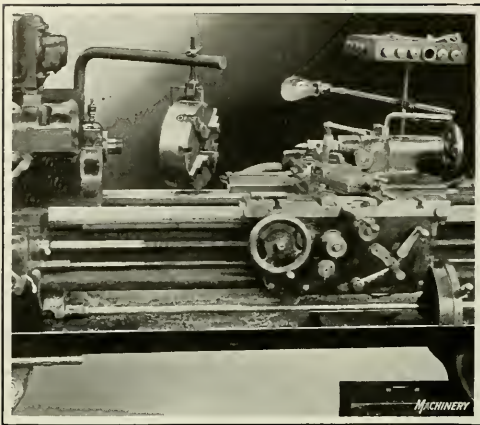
Engine Lathe provided with such Auxiliary Equipment as a Chuck Crane, a Collet and Instrument Stand, and a Tool Box
